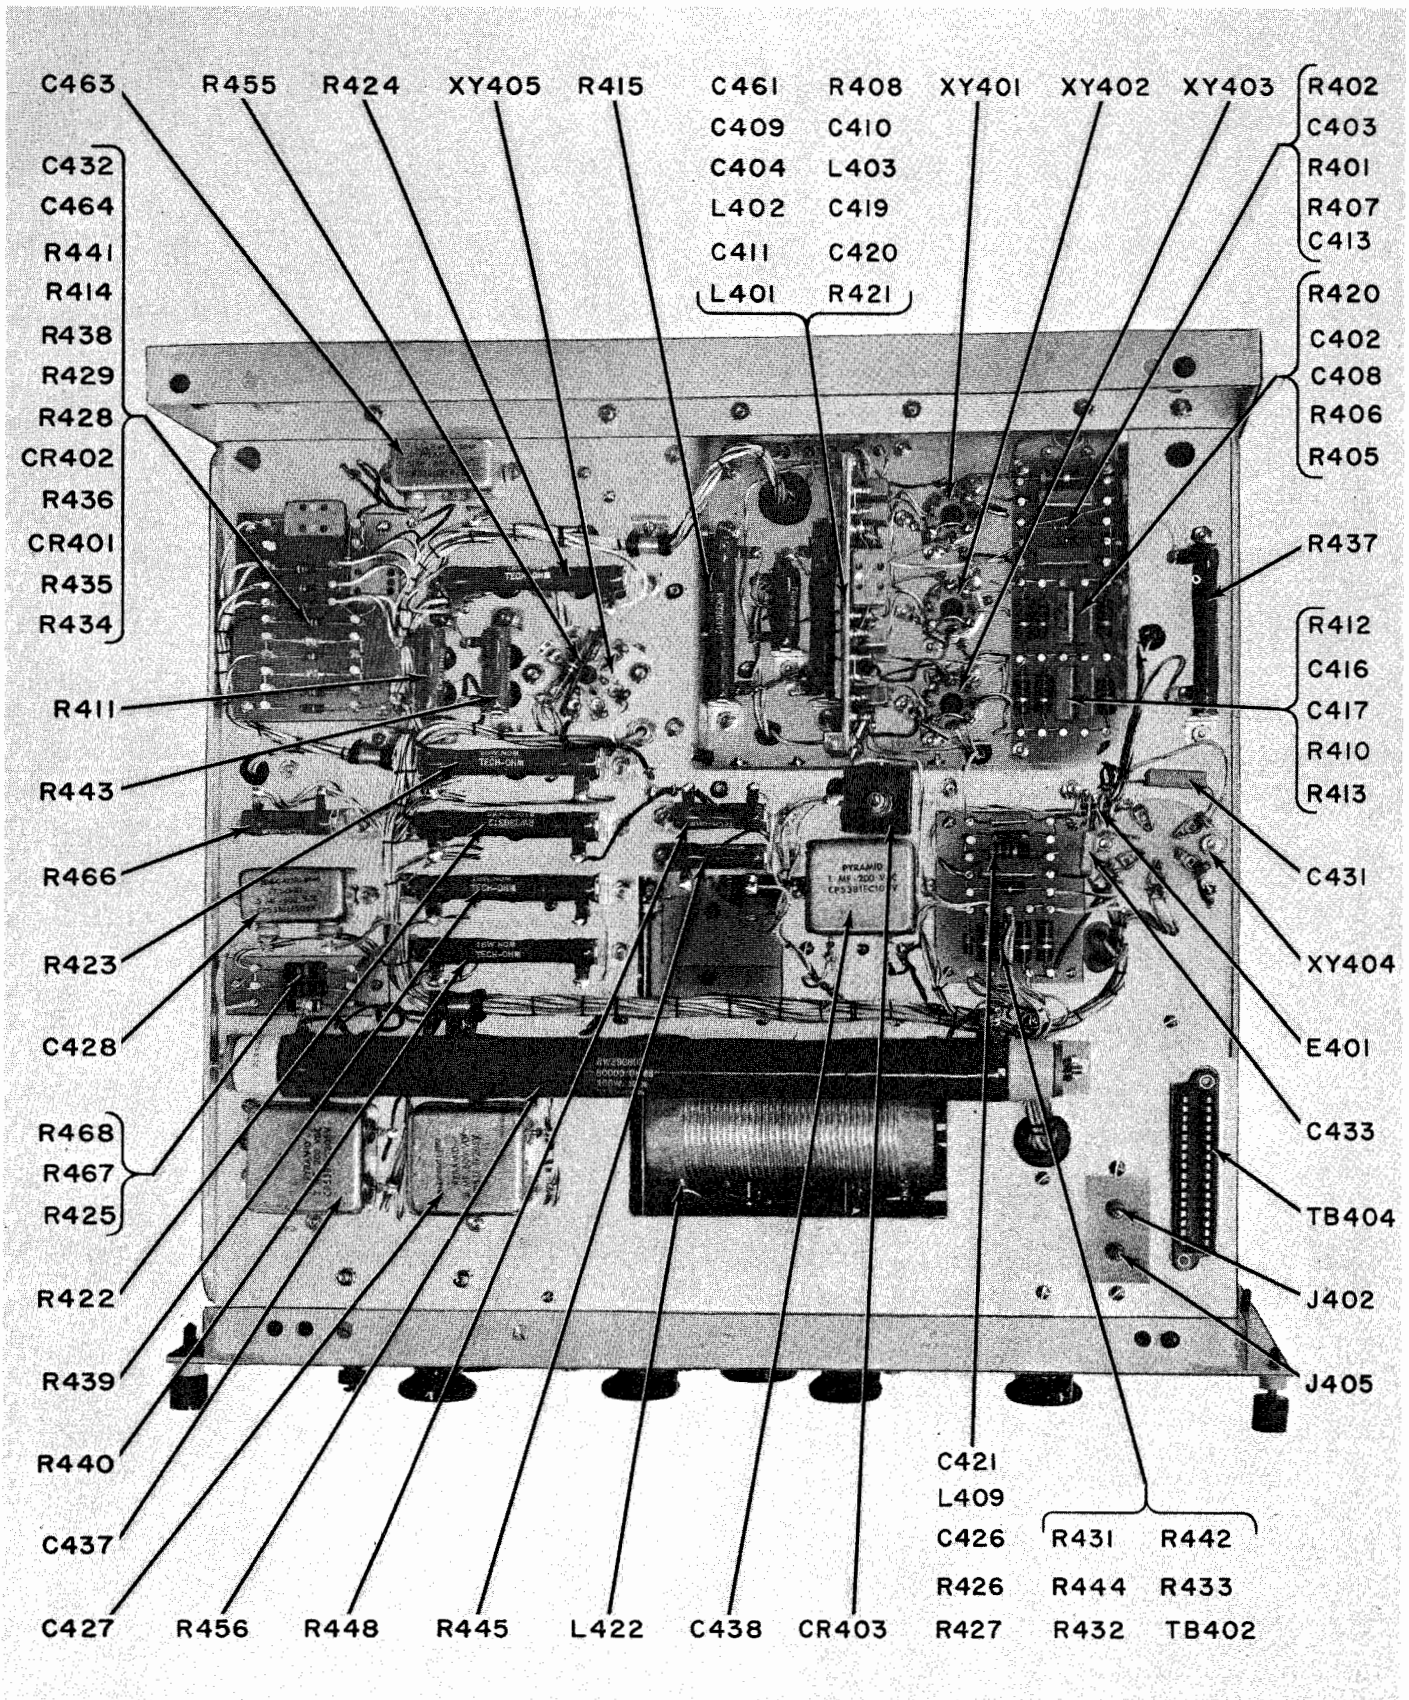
Radio Transmitter T-557(XN-1)/SRT-17, Upper Section, Bottom View
